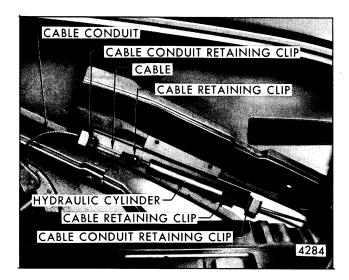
Mechanical Pull-Down Unit Hydraulic Cylinder - Cadillac "C" Styles
